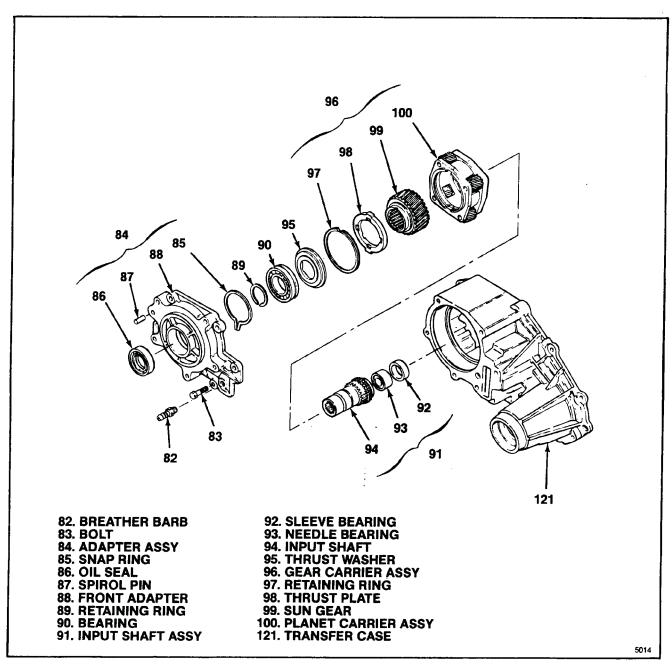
Adapter, Input Shaft and Gear Carrier Group
